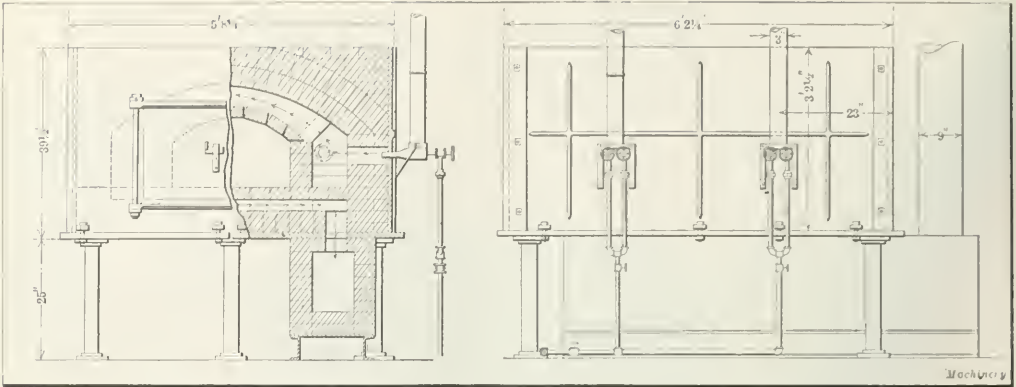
Furnace built by the Laconia Car Co., for heating High-explosive Shell Blanks for Forging
